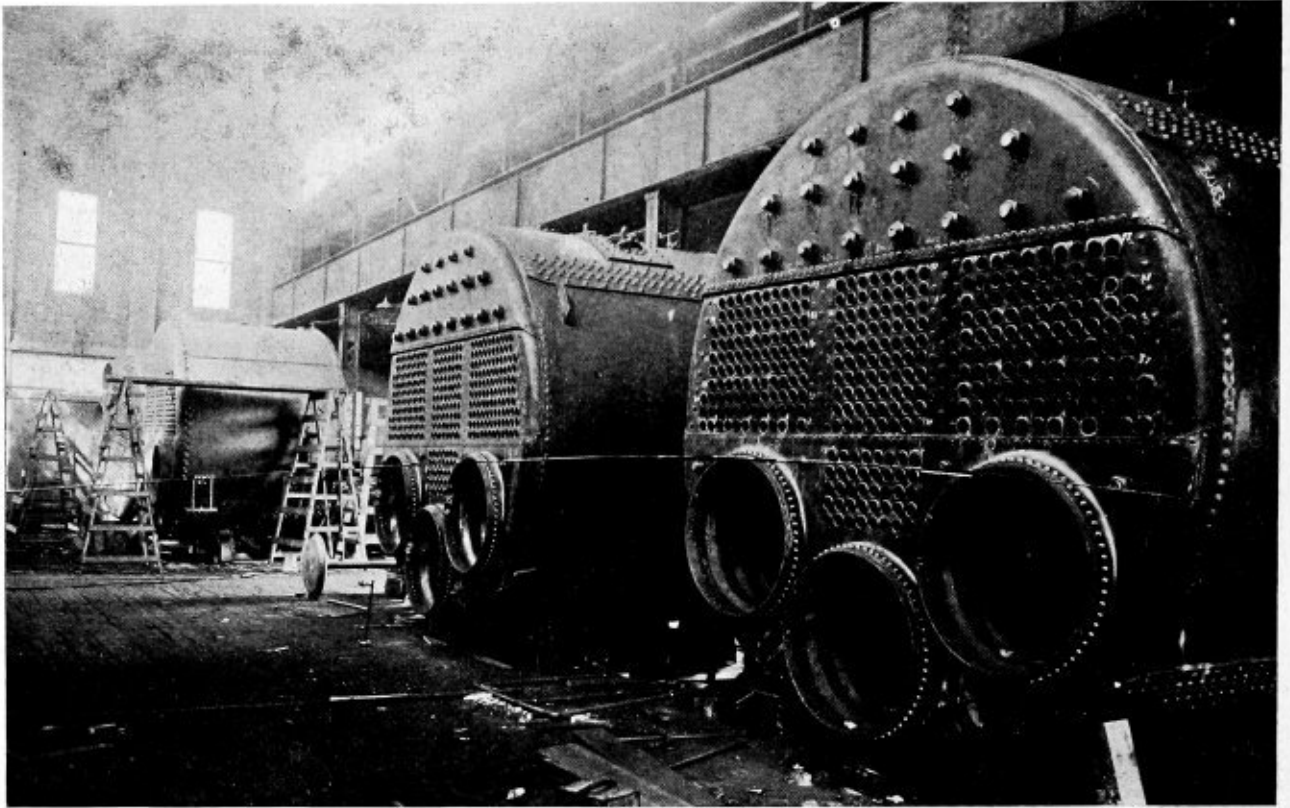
General Assembly of Scotch Boilers. Two in Foreground Ready for Hydraulic Test
